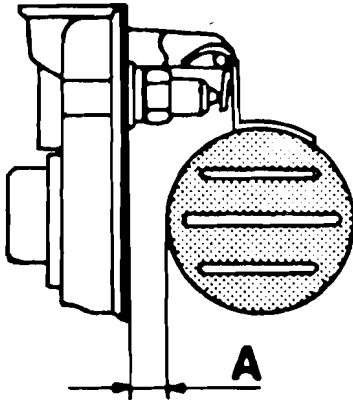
Weber carburettor float adjusting diagram (Sec 11)
